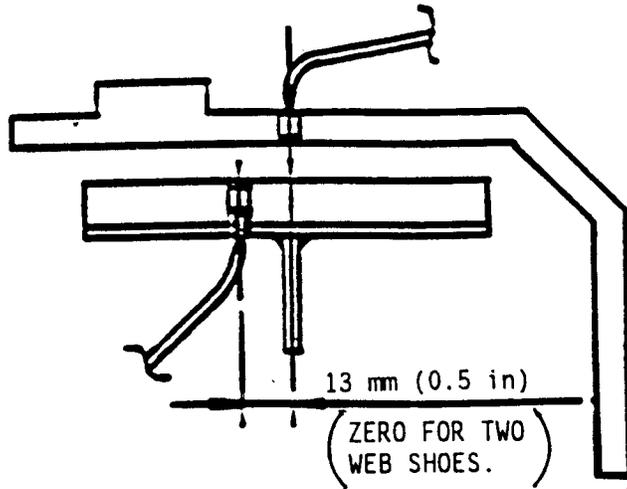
DRUM THERMOCOUPLE AND SINGLE WEB SHOE THERMOCOUPLE LOCATION
